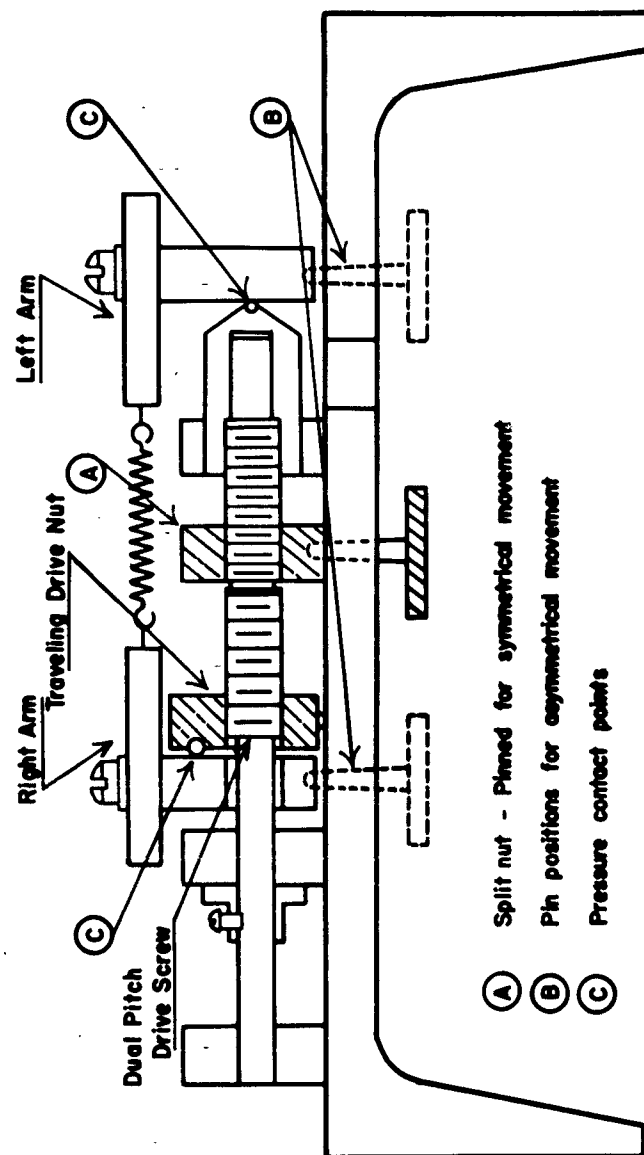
SCHEMATIC DRAWING OF DRIVE SCREW ASSEMBLY
